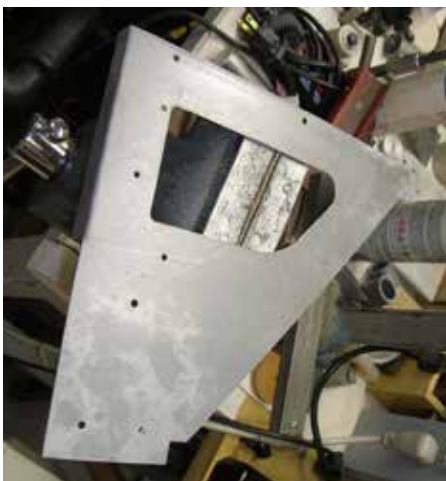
Fabricating mirror image replacement chassis side bracket.
